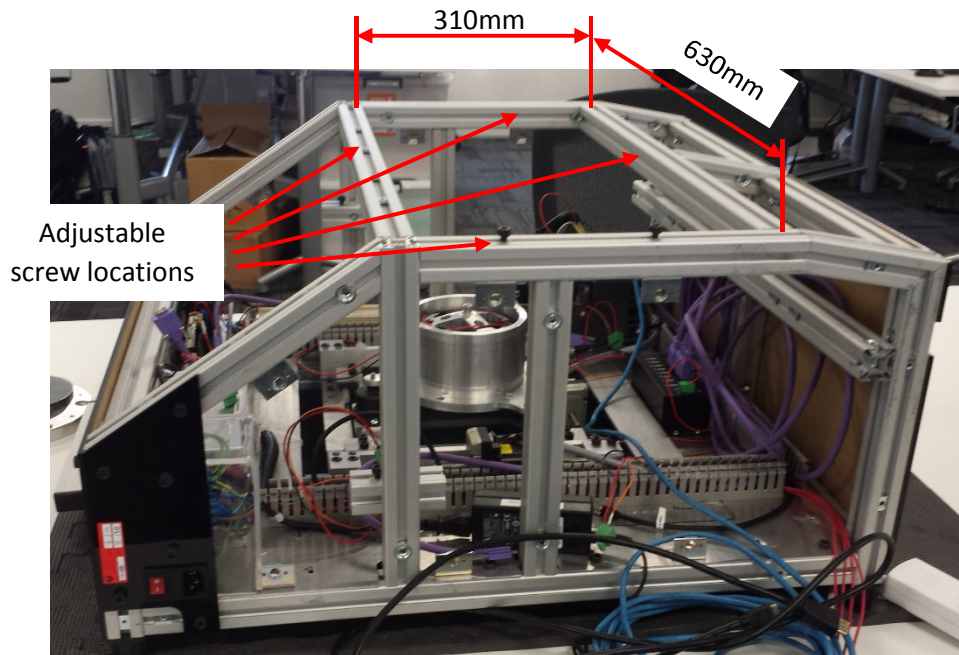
Existing machine with key dimensions showing where screws can be attached.
